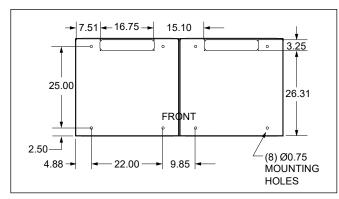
MC-1 Battery Bay Mounting Hole Dimensions (in inches), Top View
